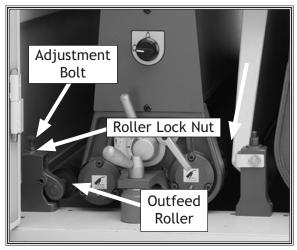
Rear sanding drum outfeed pressure roller adjustment locations (W1757).
